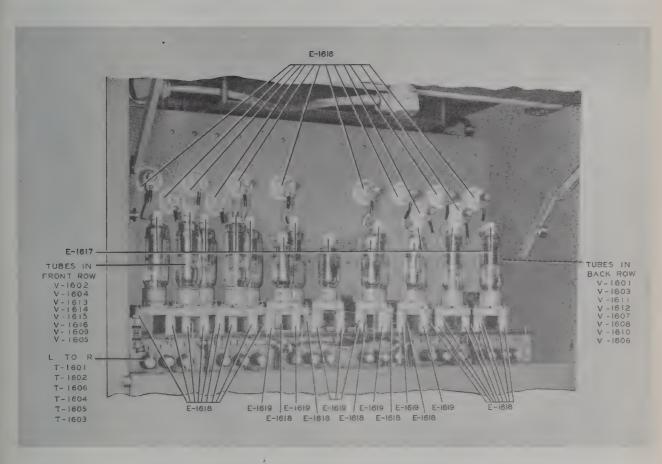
Power Supply Assembly PP-1089/FRT-22, Rectifier Compartment.
